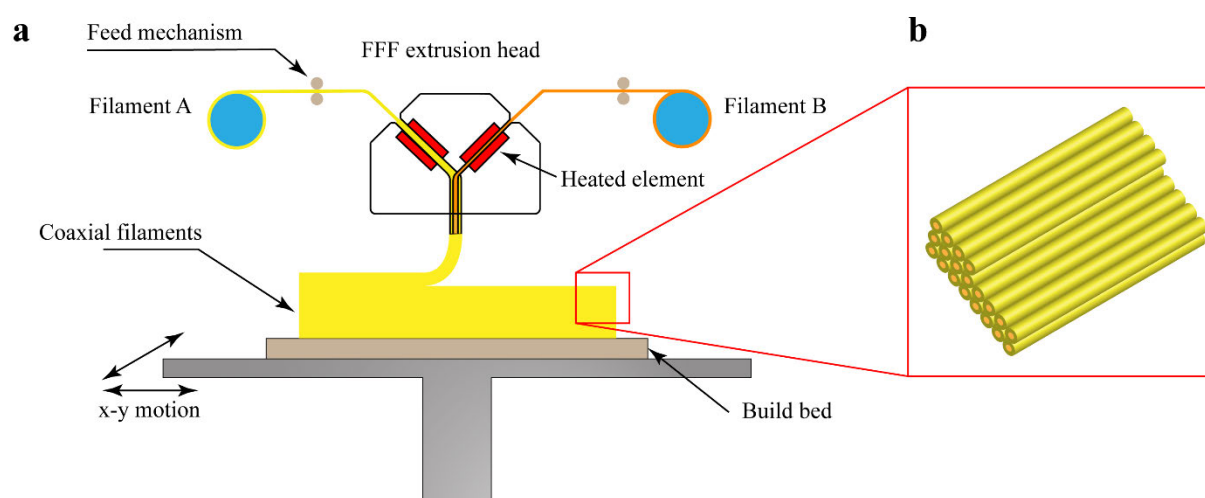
Schematic of a coaxial FFF 3D printer for fabrication of a 3D part with coaxial filaments: a a 3D printer with a custom-designed coaxial nozzle, b close up view of a multi-layer 3D printed part with coaxial filaments.
